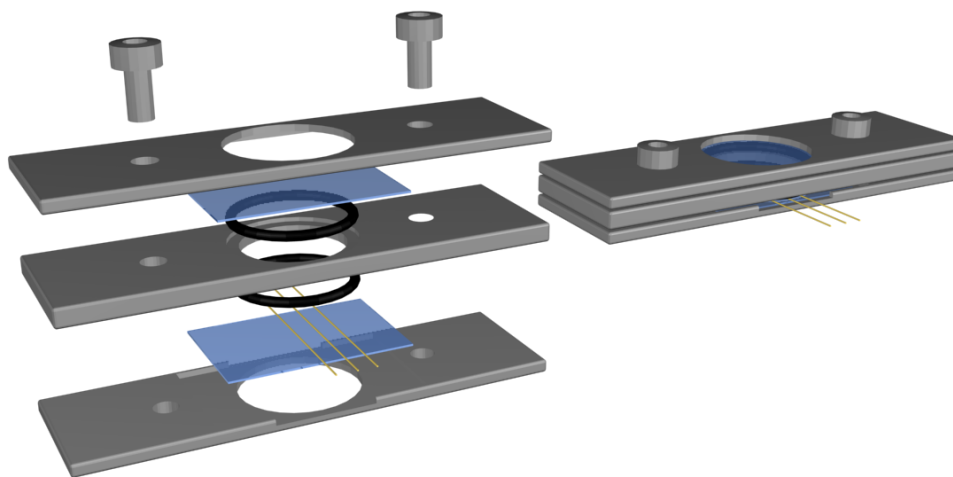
Concept rendering of platinum wire chamber showing an exploded and assembled view.
